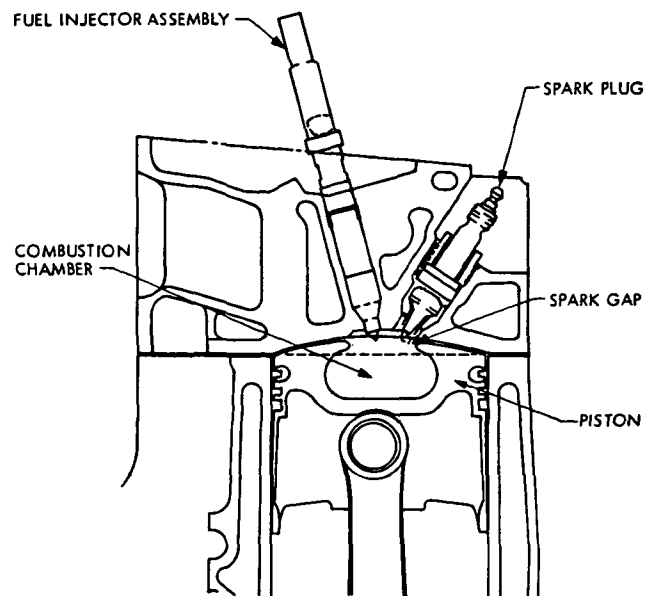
PROCO stratified-charge engine combustion chamber configuration
